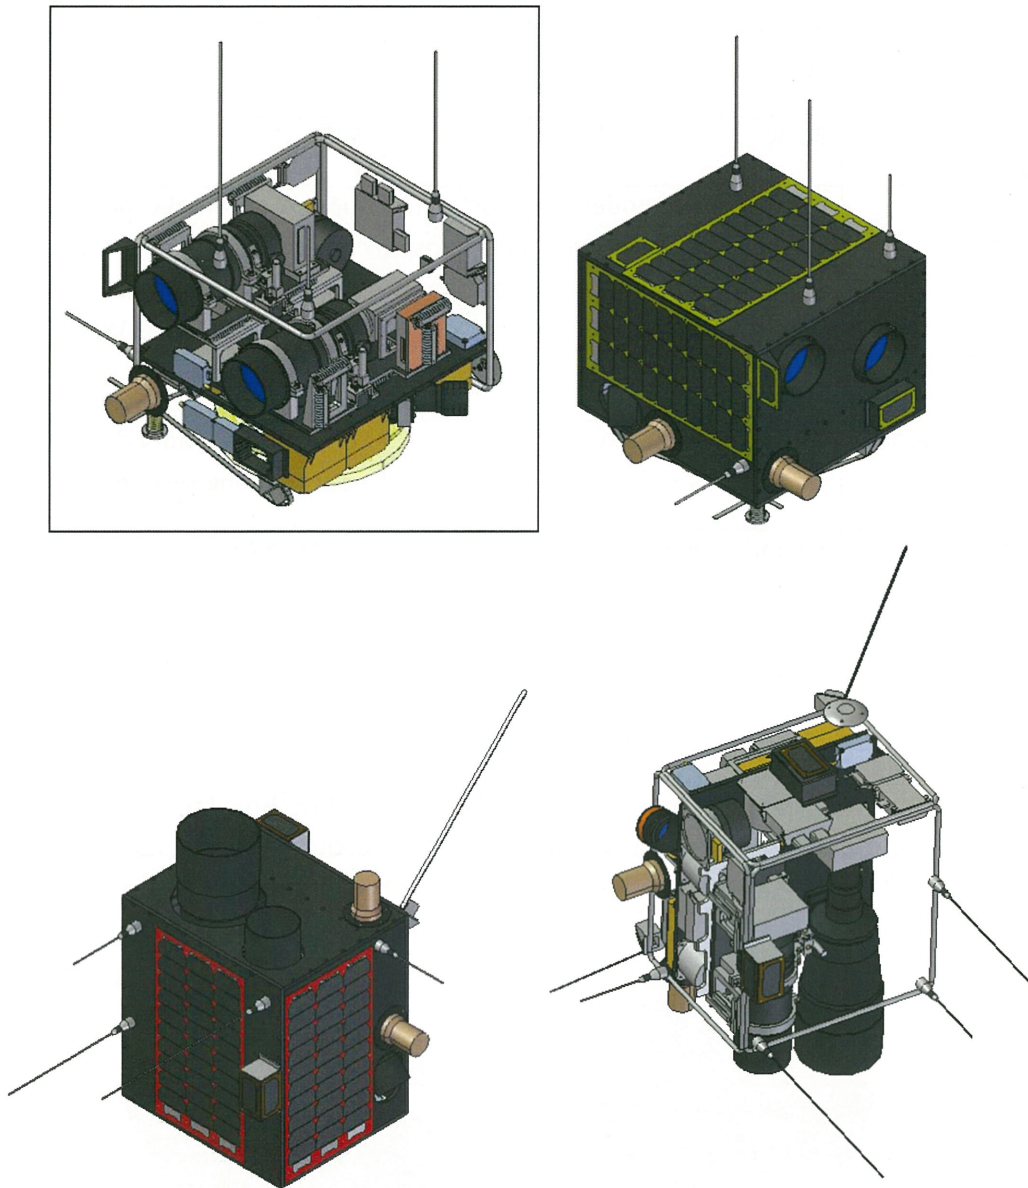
LAPAN-ORARI & LAPAN-IPB layout
